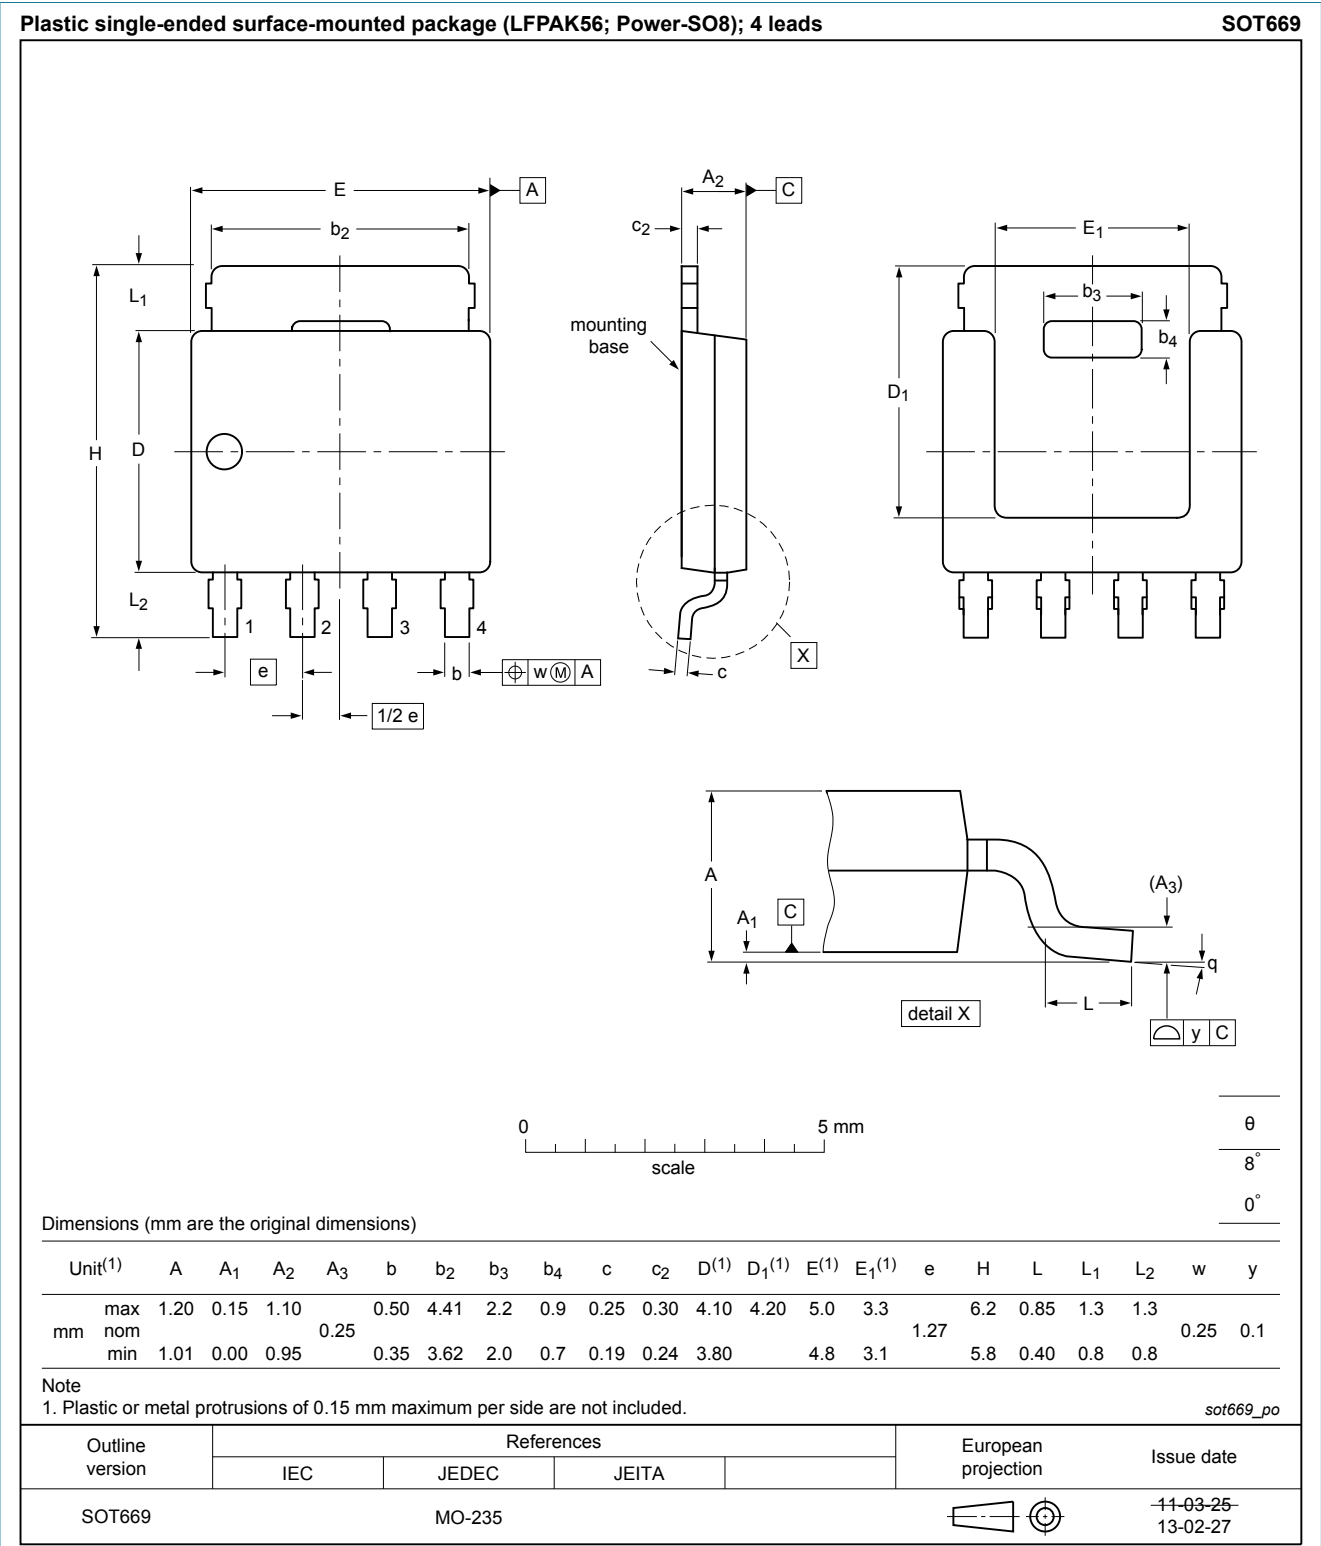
Package outline LPAK56; Power-SO8 (SOT669)
